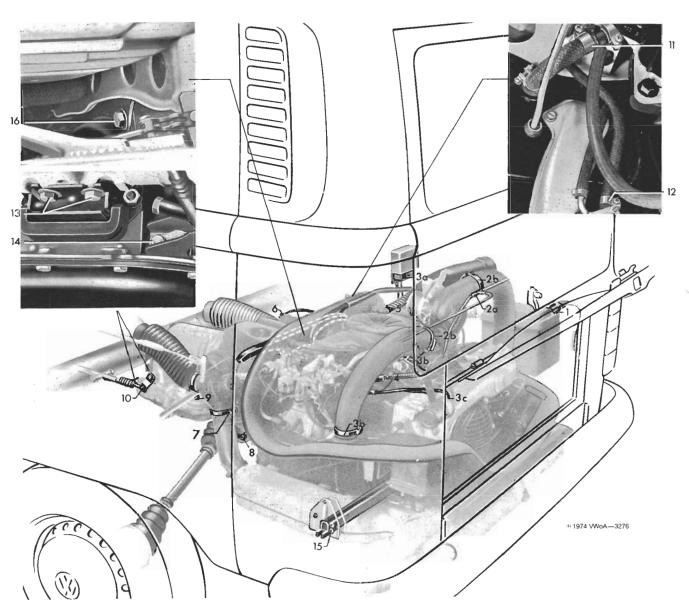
We will refer to this illustration throughout the removal procedure.
